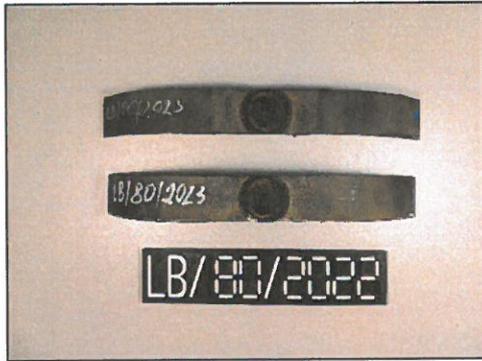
, 40 Samples LB/80/2023 after bending test on welded plugs
